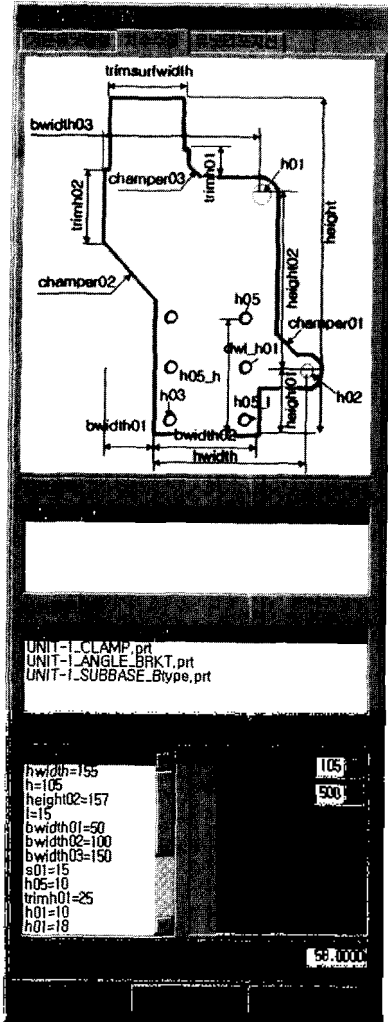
GUI of the dimension modification function for parts in a jig unit.
